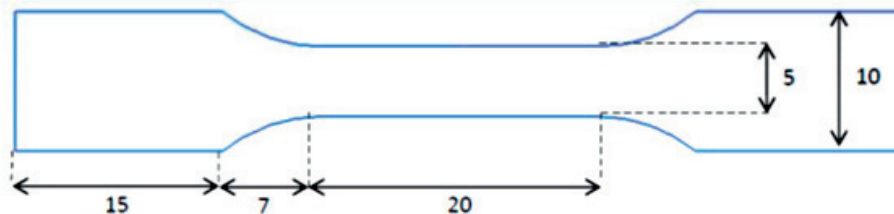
Specimen used for tensile testing (all dimensions are in mm)
